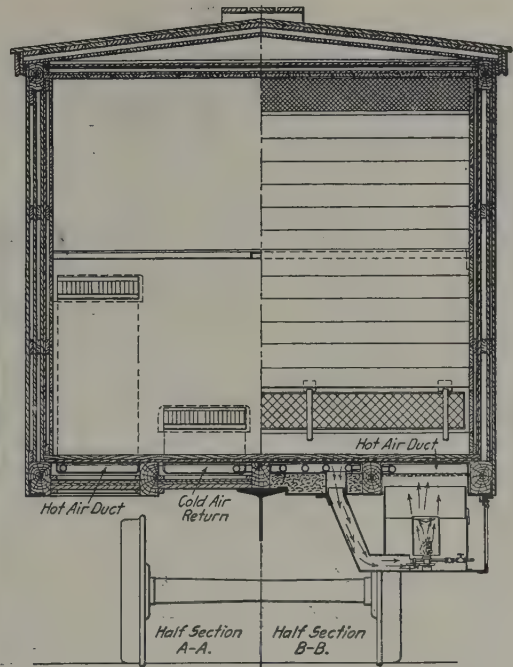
Cross Sections of Refrigerator Car Shown in Fig. 901, Showing Application of Heater.
